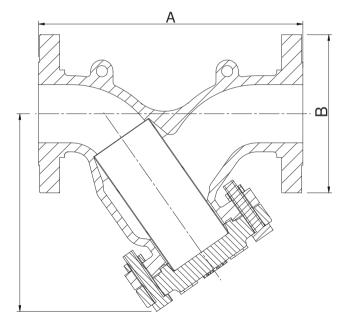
Dimensional drawing of FMSTR34 / FMSTR54
